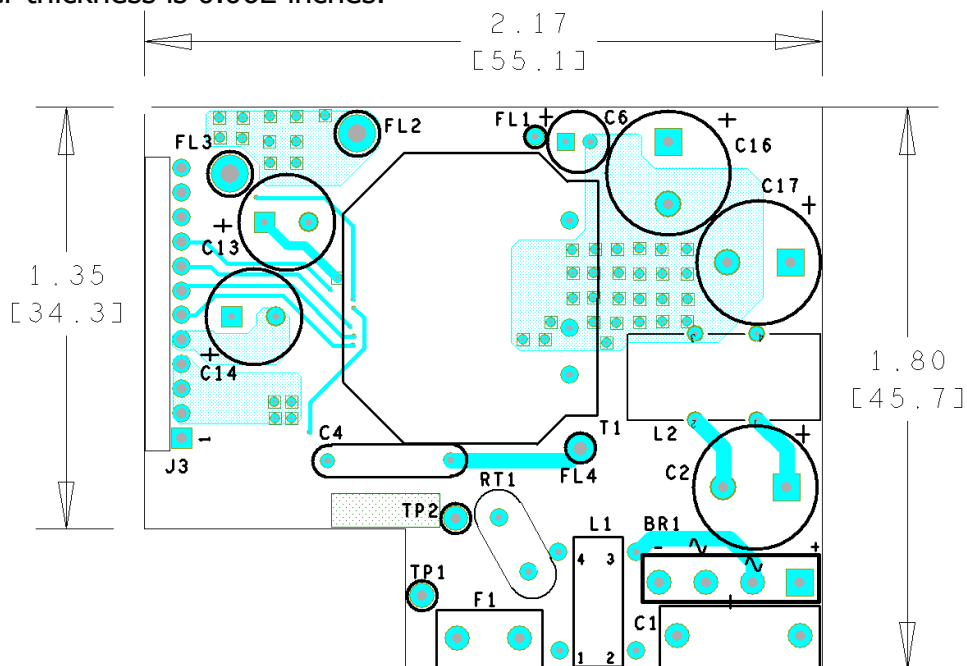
Printed Circuit Layout, Mother Board, Top.
